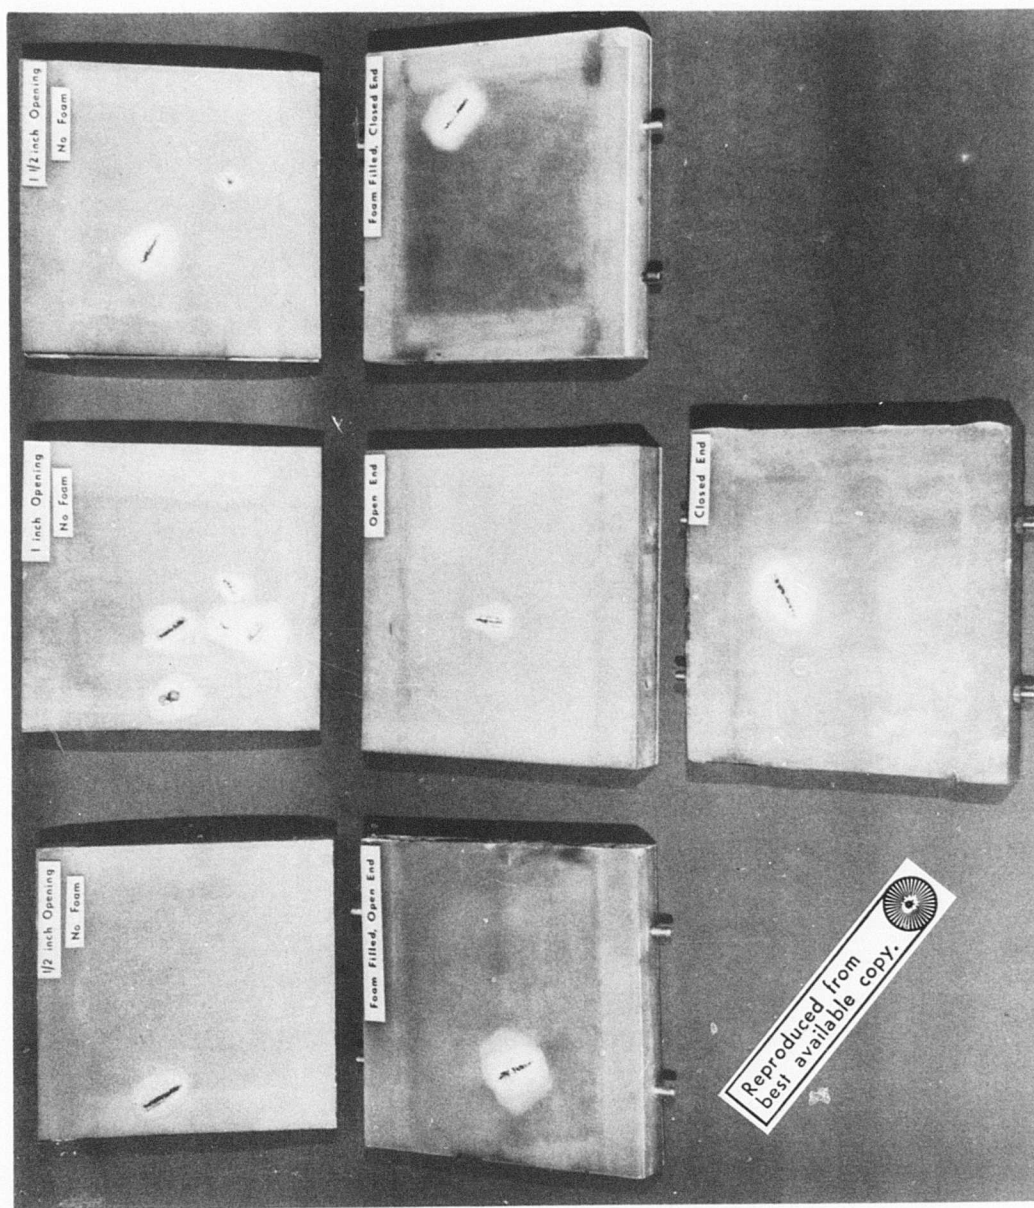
Typical Entrance Damage on Various Types of Sandwich Construction.
